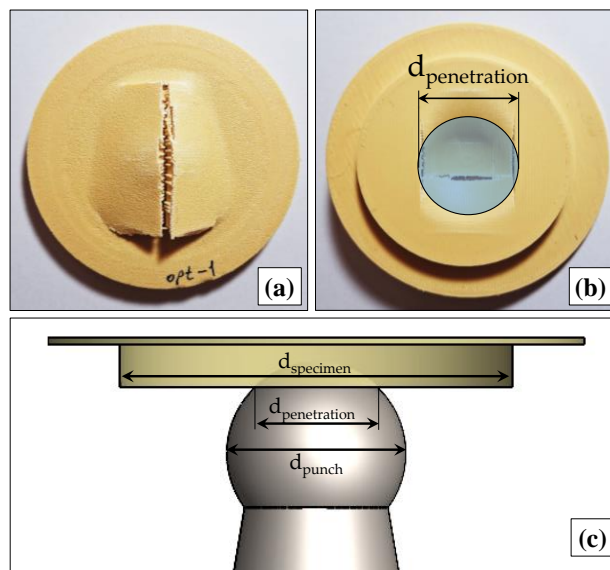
(a) Front view, (b) back view of the fractured specimen and (c) comparison of the penetration and punch diameters at failure
